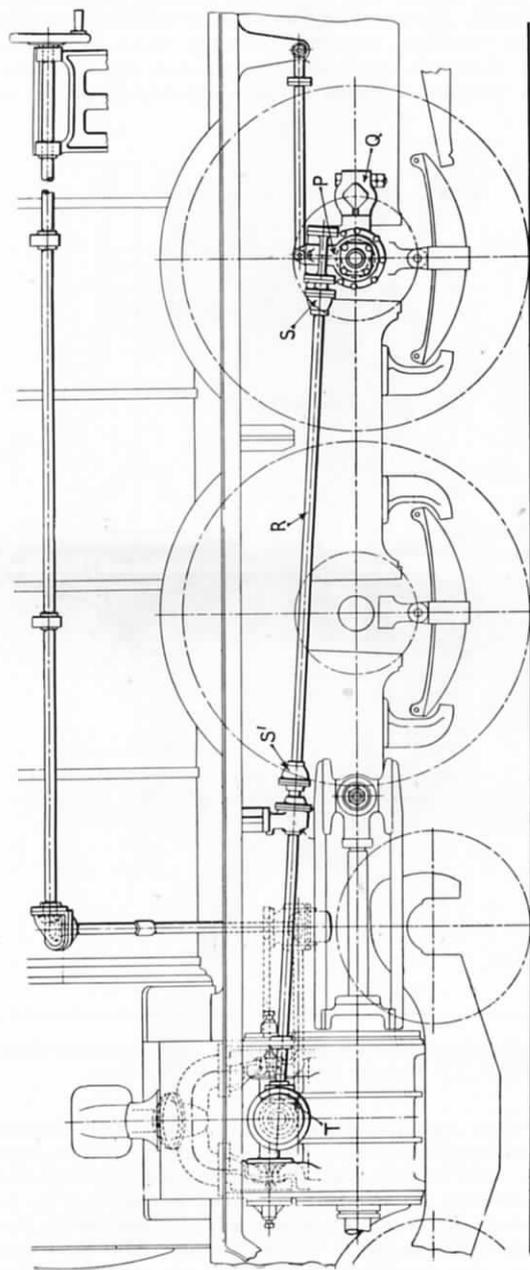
GENERAL ARRANGEMENT OF DRIVE FOR "A.L.E." "R.C." POPPET VALVE GEAR.
